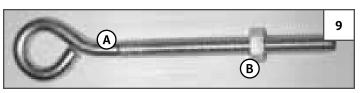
THREADING HEX NUT ONTO EYEBOLT
